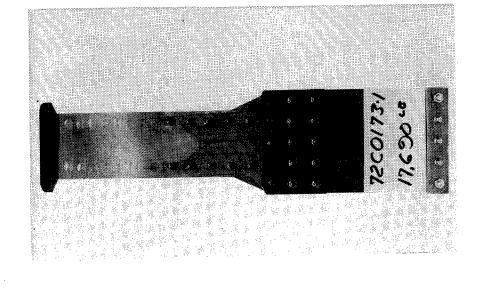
Stringer Side of Failed Spotwelded Compression Fitting.
